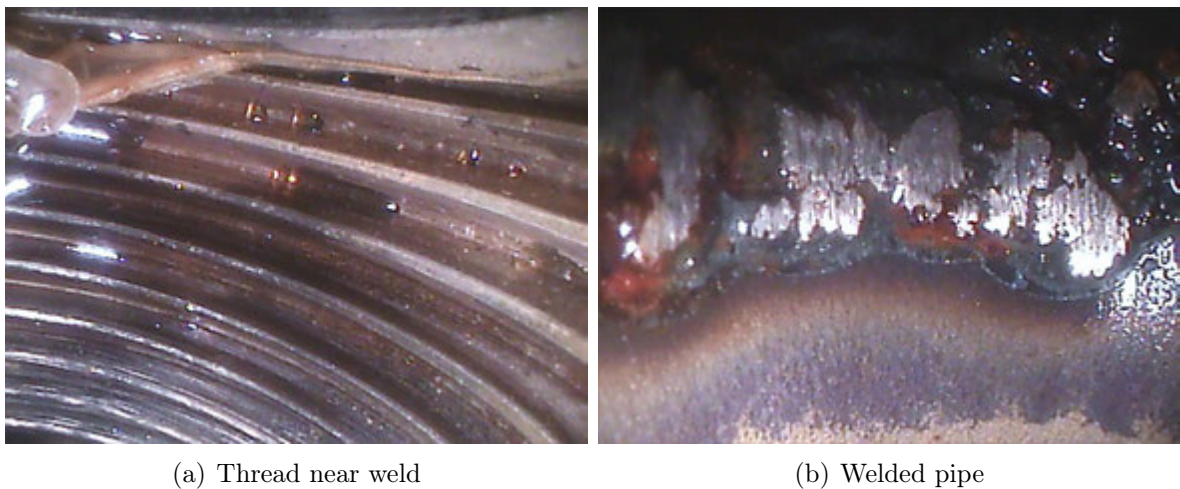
Rust on stainless steel surfaces in proximity of welds, located at the inner side of pipes
